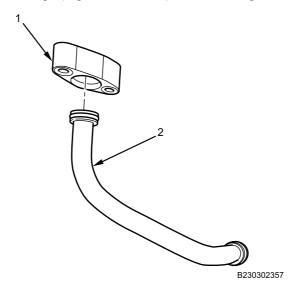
Turbocharger Lubricant Drain Tube Flange.
